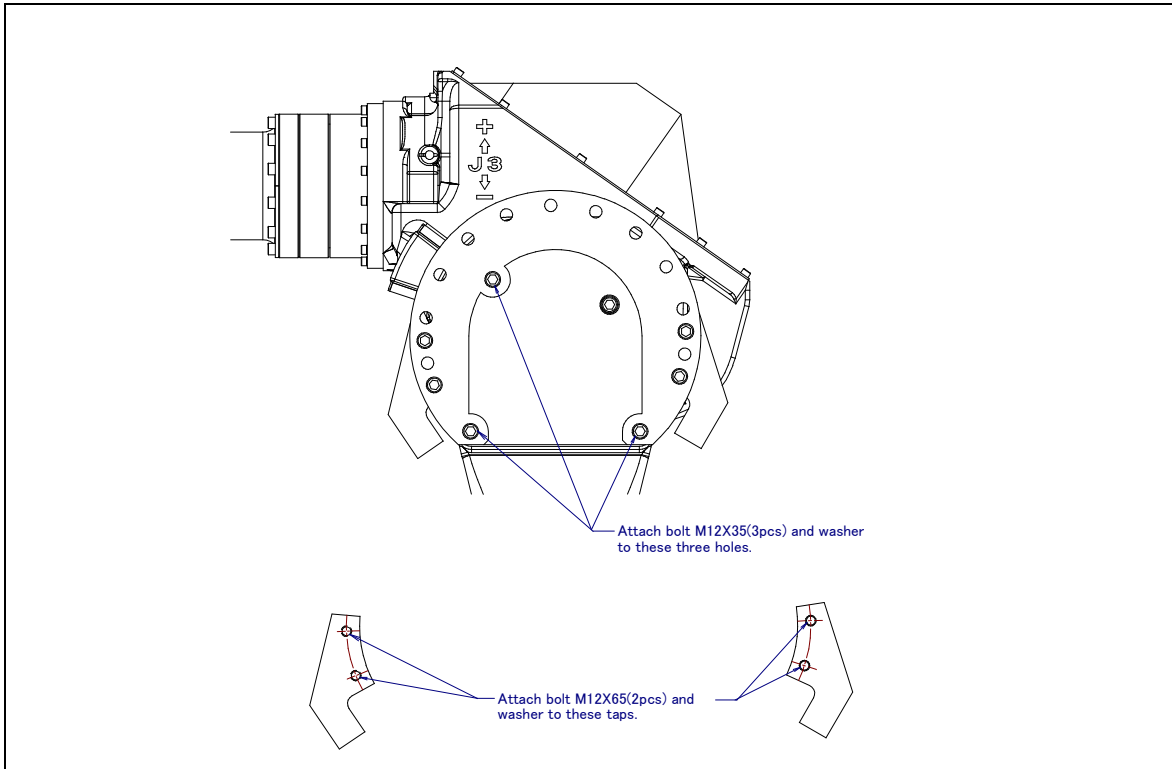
(b) J2-Axis movable mechanical stopper (M-710iC/50, /70, /50H, /50E)
